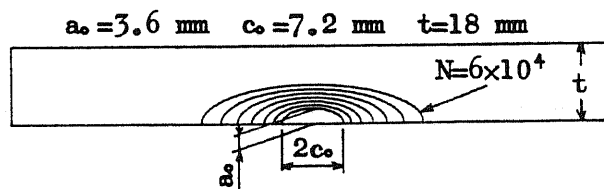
Fatigue crack propagation in the outer shell to bottom joint
